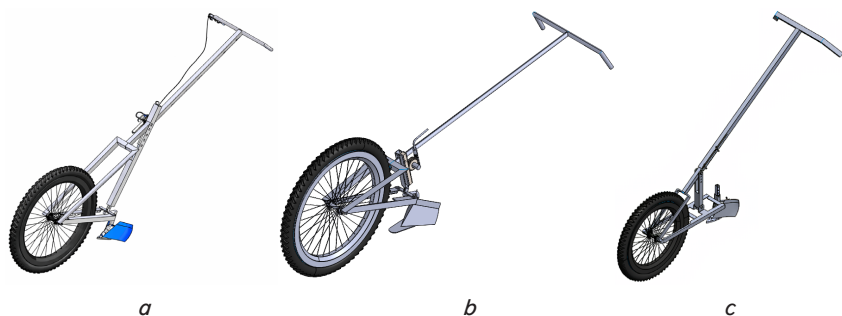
Conceptual solution drawings for height adjustment mechanism: a – quick-release pin; b – rack-and-pinion; c – wing bolts
